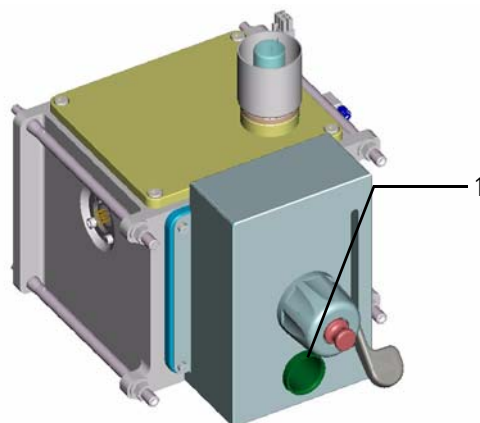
Valve shield (1) covering the vacuum manifold probe plate
